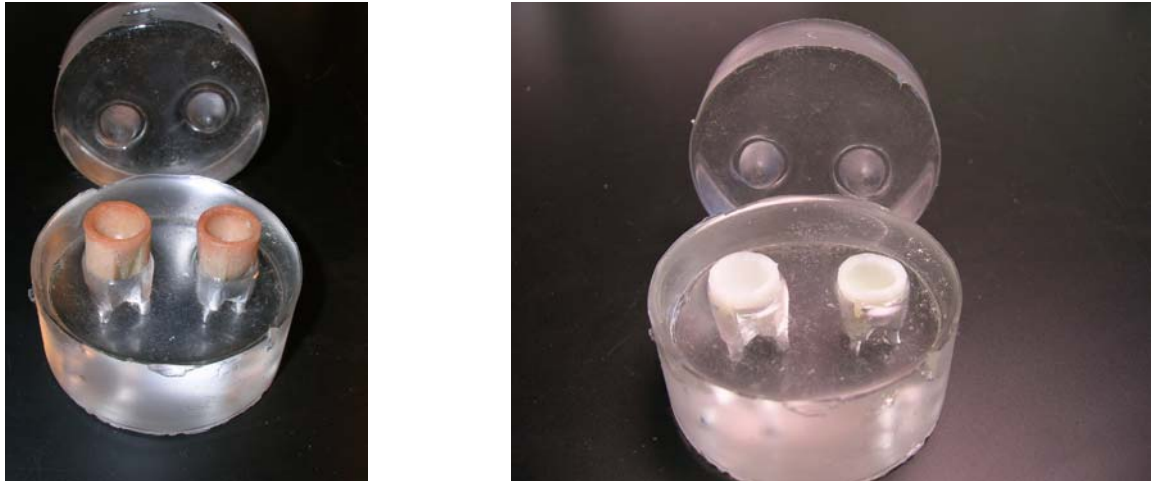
Parabolic valve dies being extracted from mold (left). PVA valve being extracted from mold (right)
